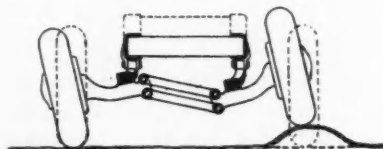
View showing one front wheel in raised position. (Rear wheels dotted)
